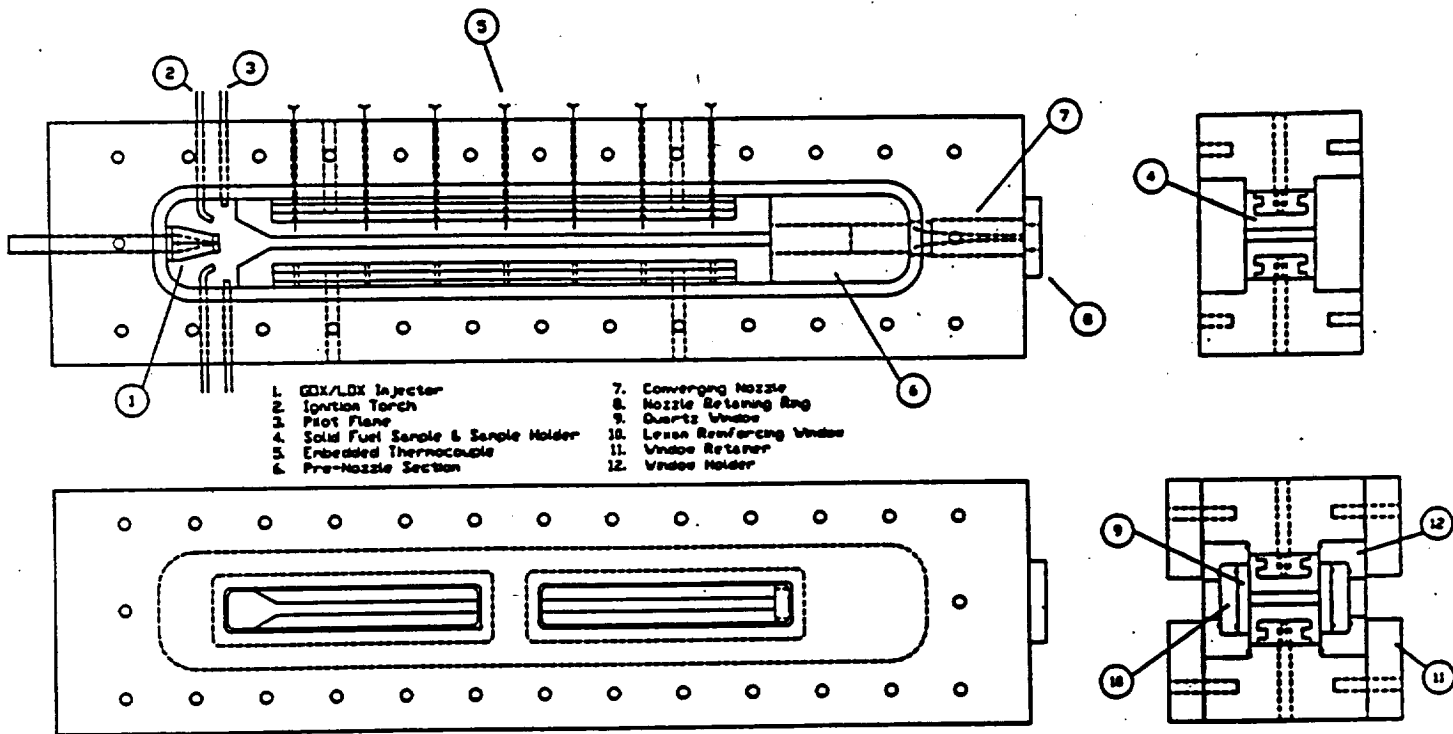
Partial Assembly Drawing of Hybrid Test Chamber.
